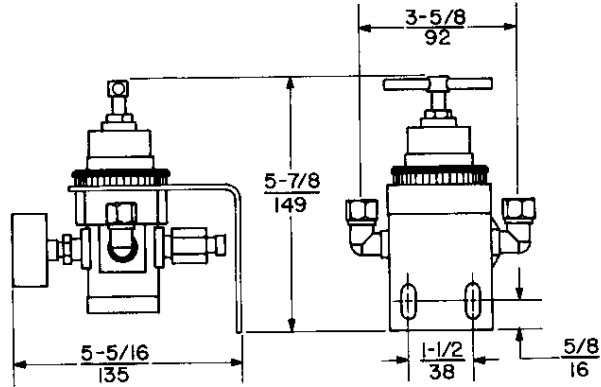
A-4000-138 Dimensions $\frac{\text{in.}}{\text{mm}}$
